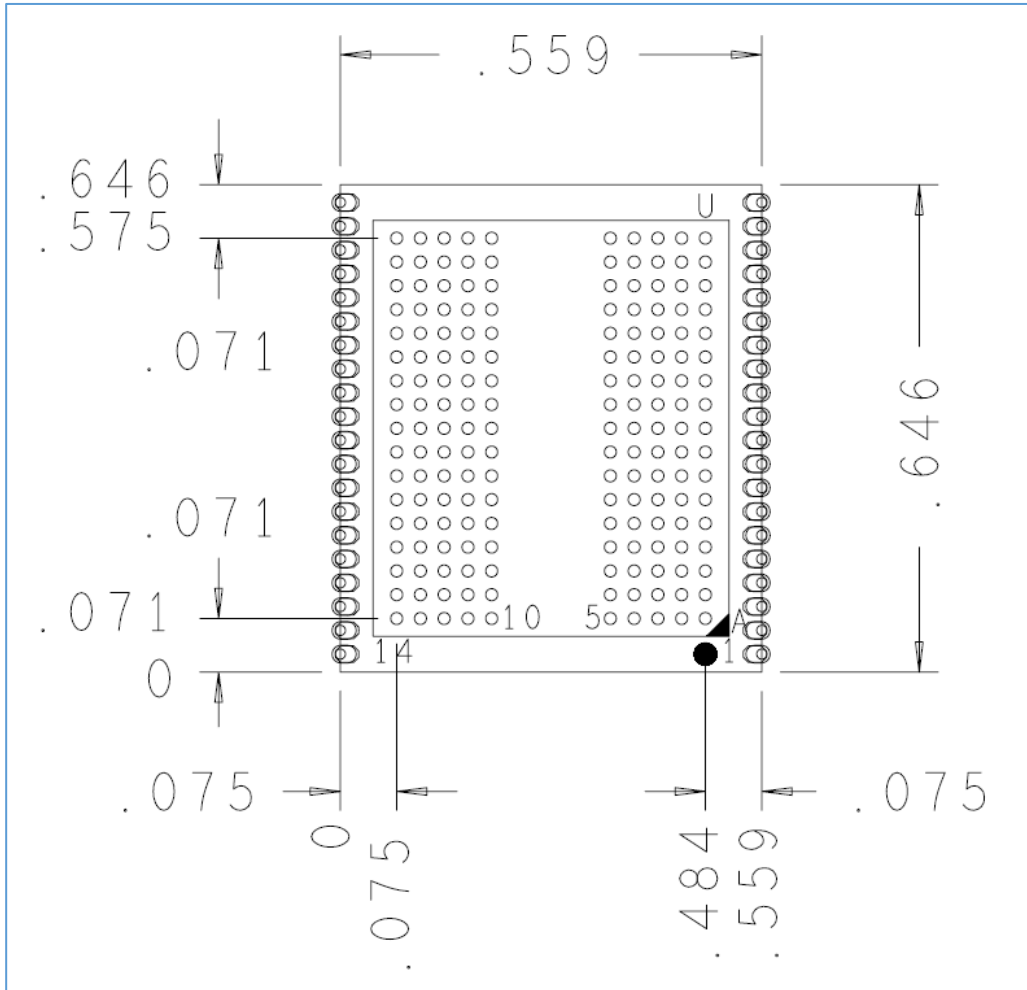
GDDR5 170 Ball EdgeProbe Interposer Mechanical Dimensions
